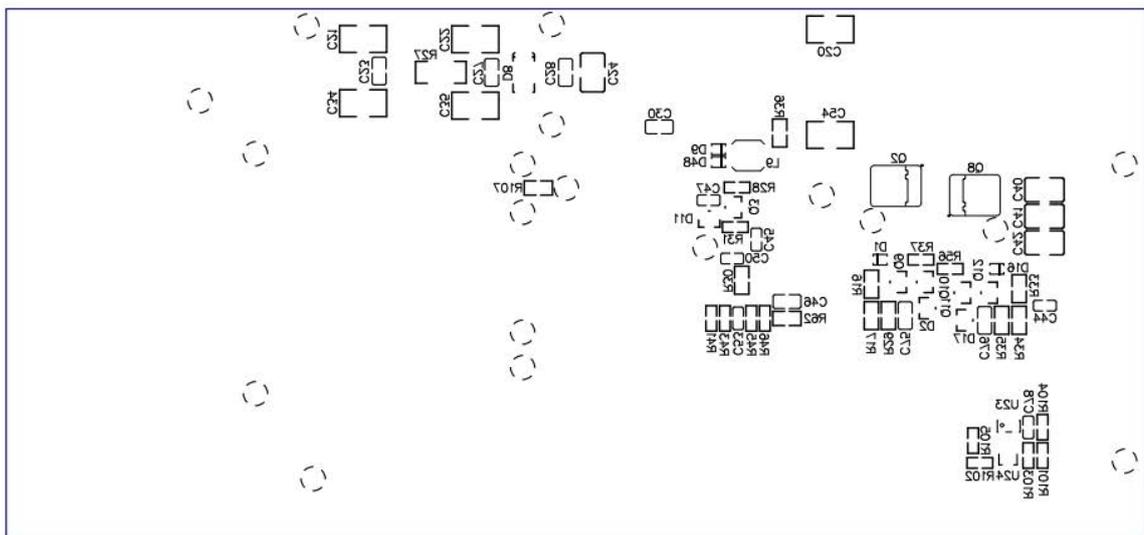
STEVAL-POE003V1 reference design: PCB layer 1 (top)
